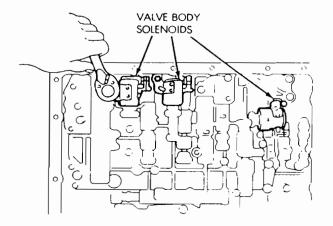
Oil Screen Removal/Installation Fig. 8 Valve Body Solenoids
